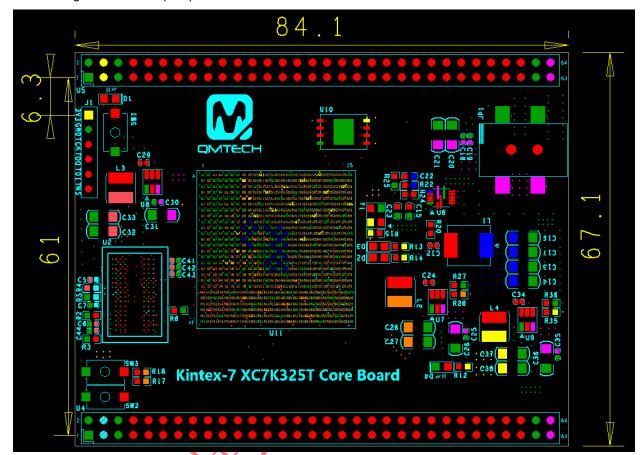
, QMTECH XC7K325T Core Board Dimension
